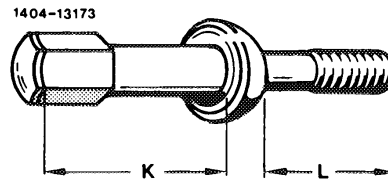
/2 Wheel mounting screw for light alloy wheels, model 107
